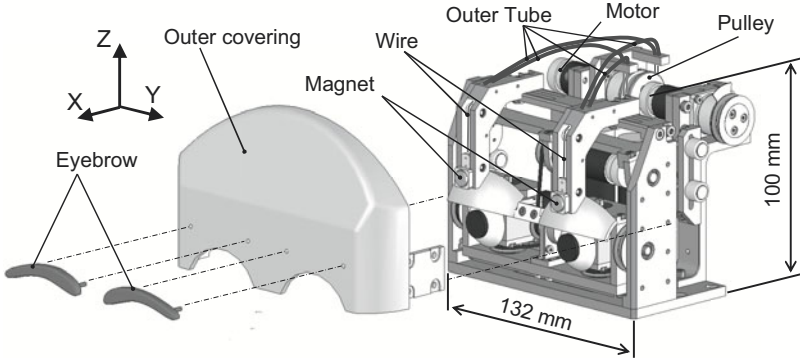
Exploded view of the driving parts and the outer covering of the eyebrows
